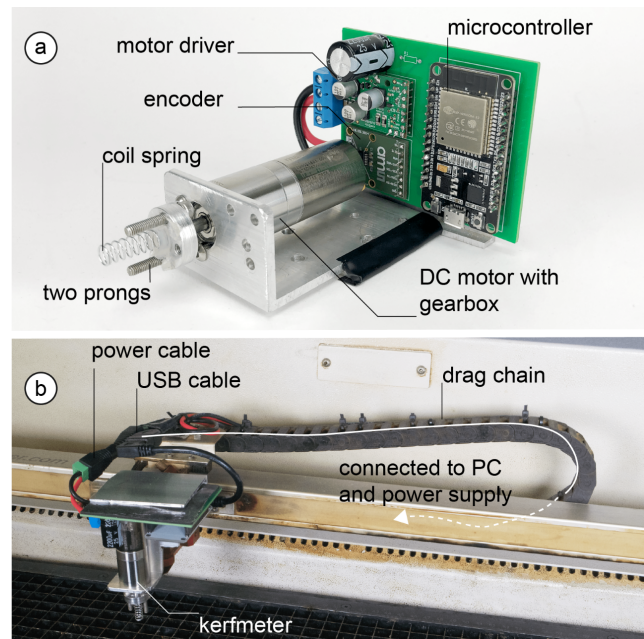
(a) The Kerfmeter device, (b) mounted in the cutter (*Trotec Speedy 360*) with cables piggybacked on the laser cutter's drag chain.
